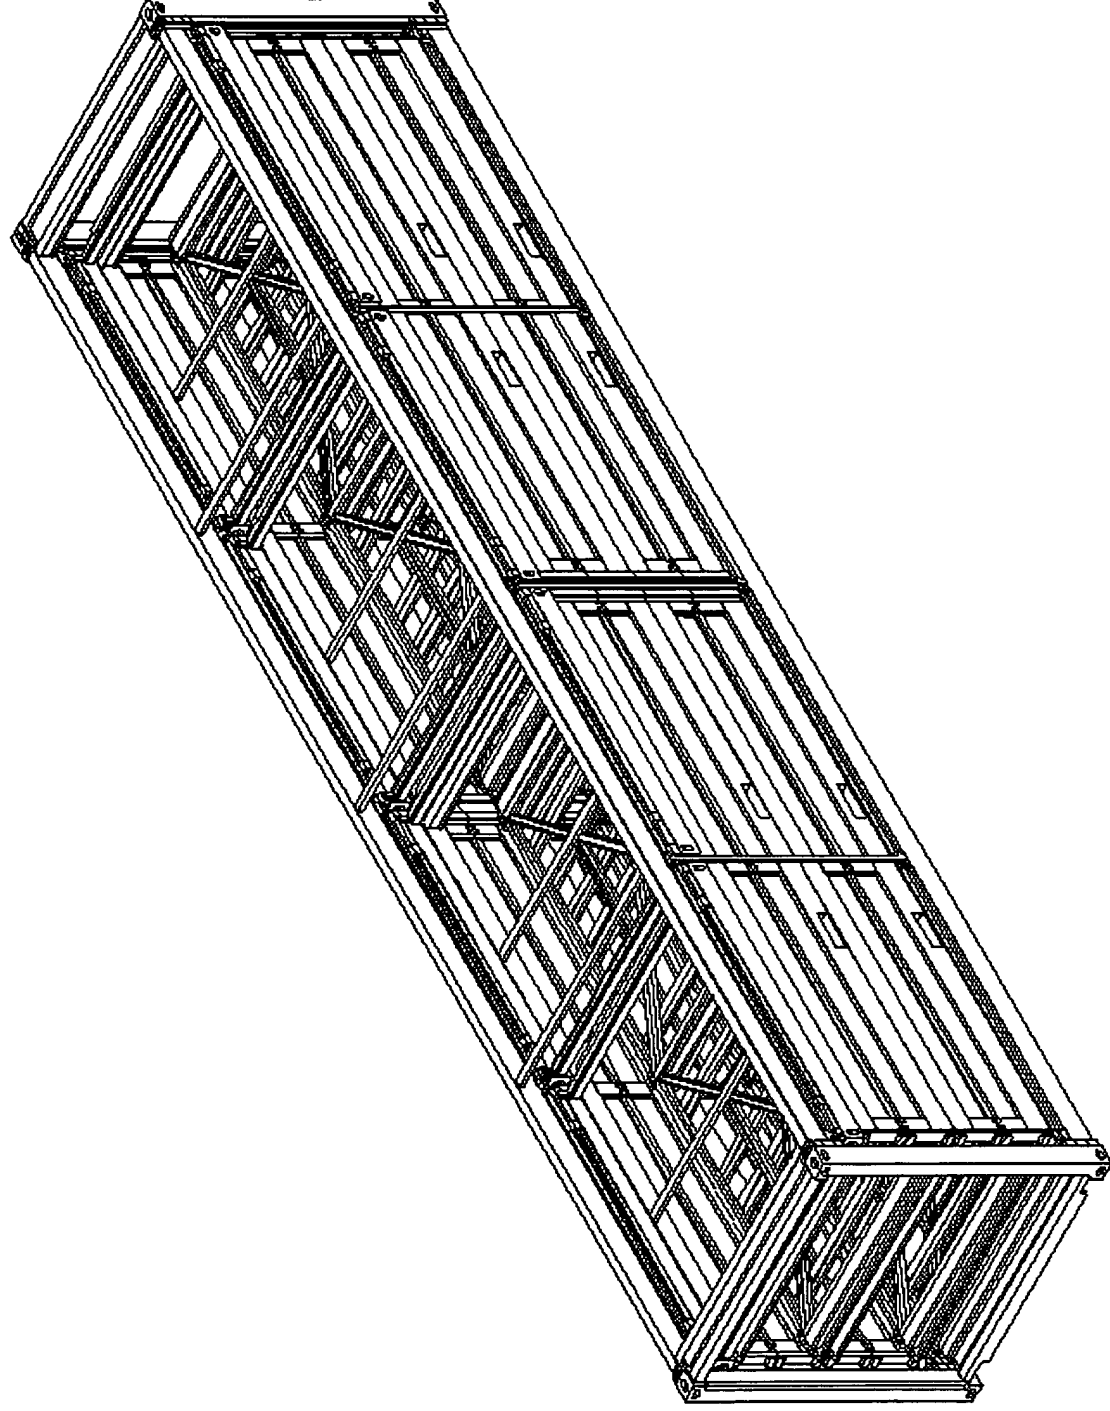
D: Step8 of disassemble and load process: The six vertical beams are assembled.
